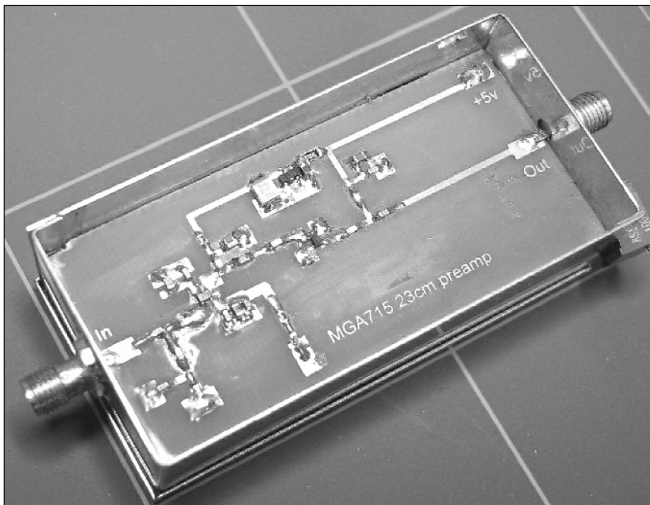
The prototype 23cm switchable amplifier in its tinplate box. This view shows the component side of the PCB
